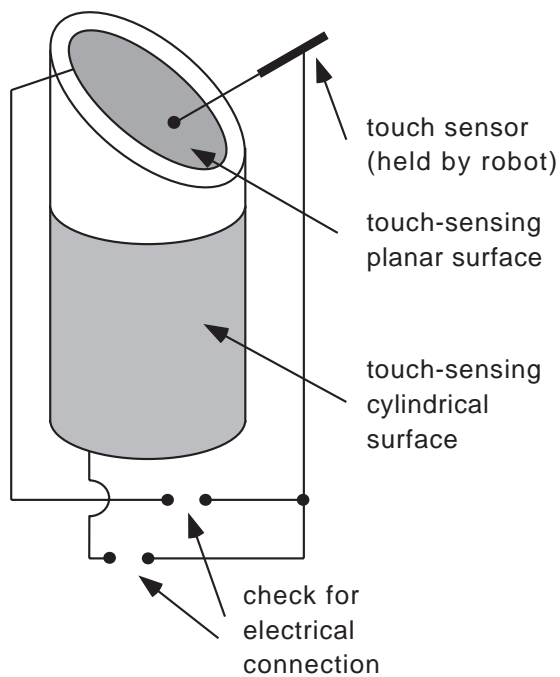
THE TOUCH SENSING CIRCUIT FOR THE CYLINDER-PLANE FIXTURE
